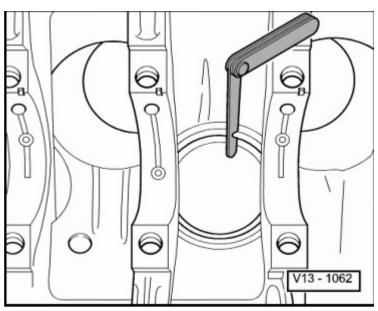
Checking Piston Ring Gap Courtesy of AUDI OF AMERICA, LLC
